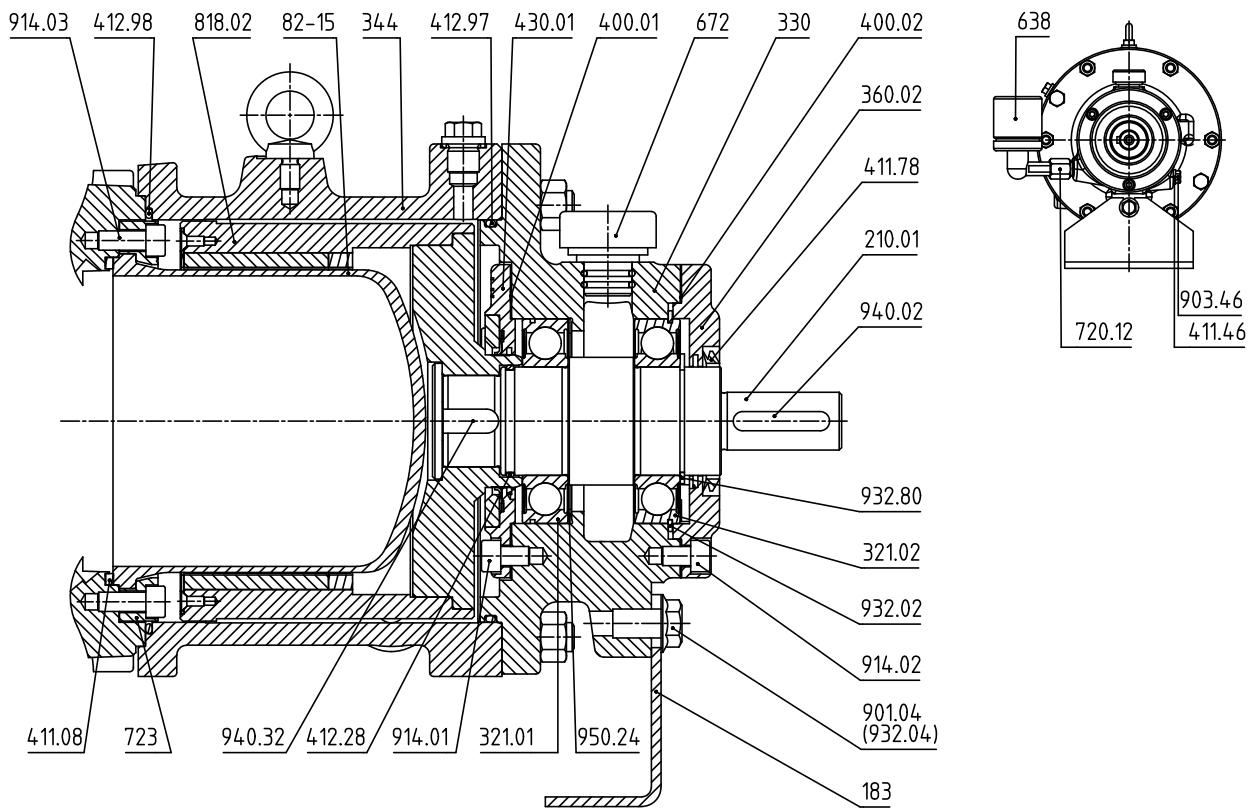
Model with bearing bracket with oil lubrication and shaft seal ring as leakage barrier
